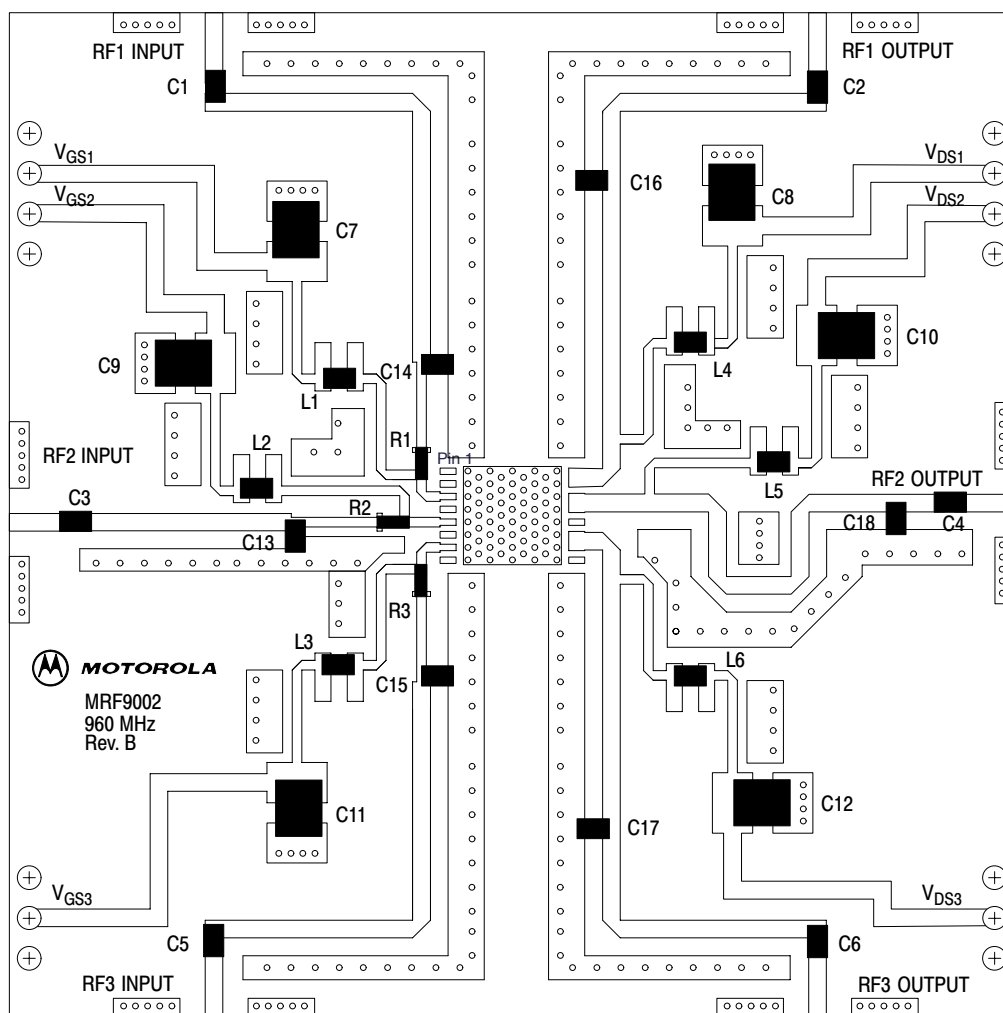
MRF9002R2 Broadband Test Circuit Component Layout
